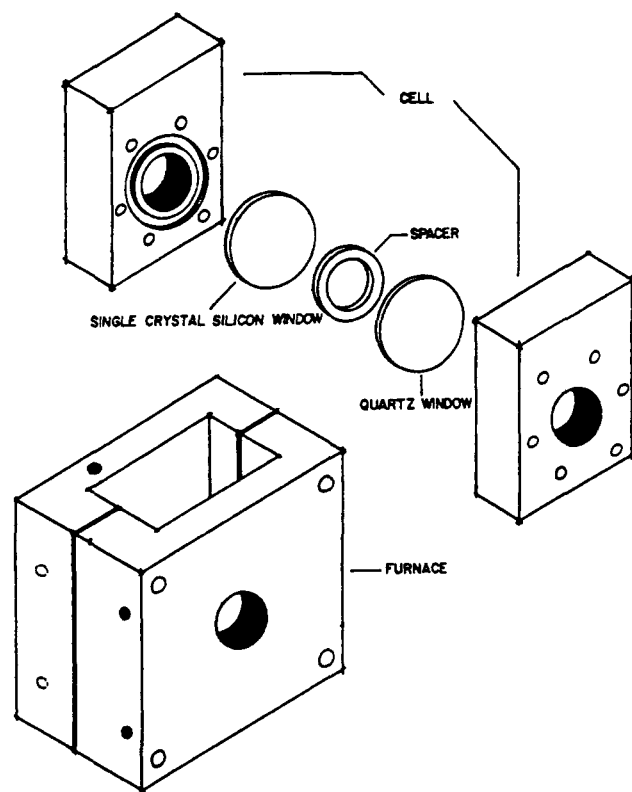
Exploded view of the cell and furnace used to mount molten polymer specimens on the spectrometer sample stage.
